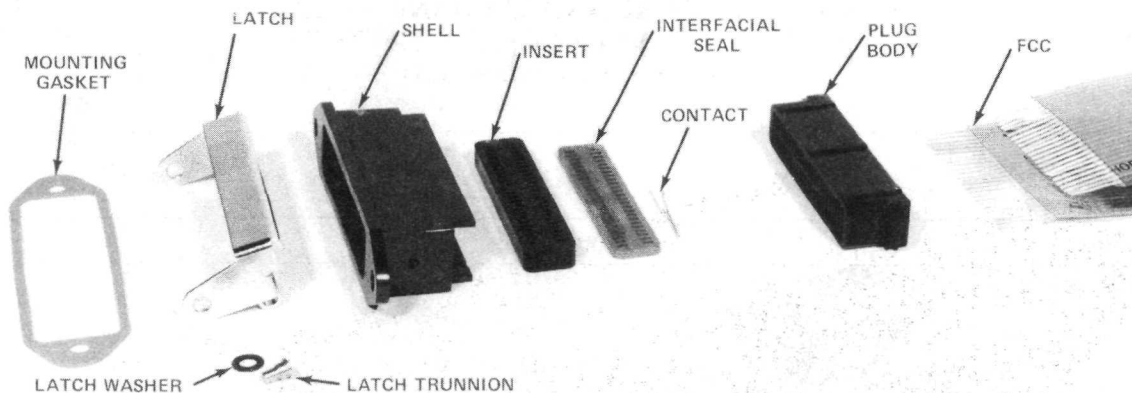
Exploded view of FCC to round wire cable connector with individually sealed contacts (prototype).
